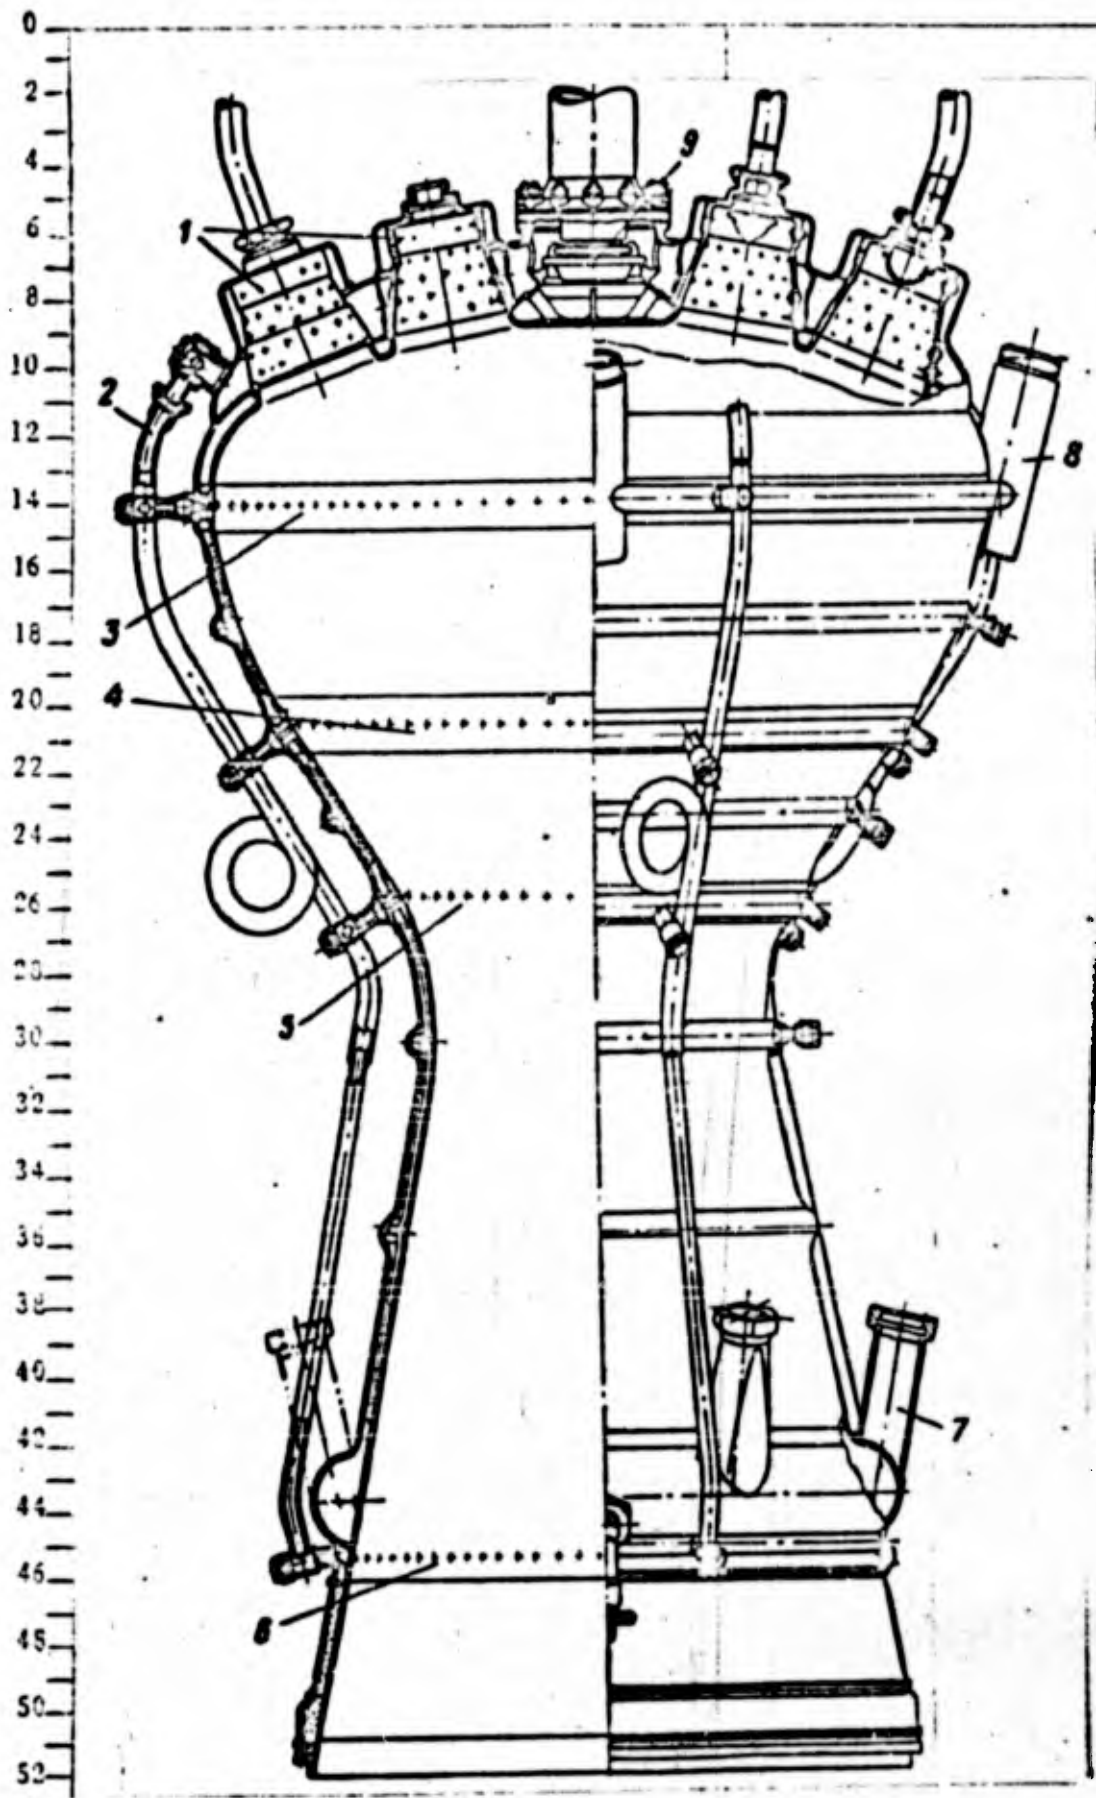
Pear-Shaped Chamber with Flat Head
